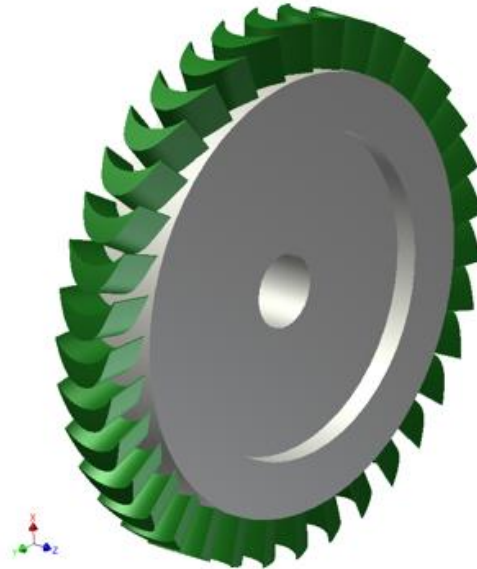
Three-dimensional geometry of the microturbine rotor disc
